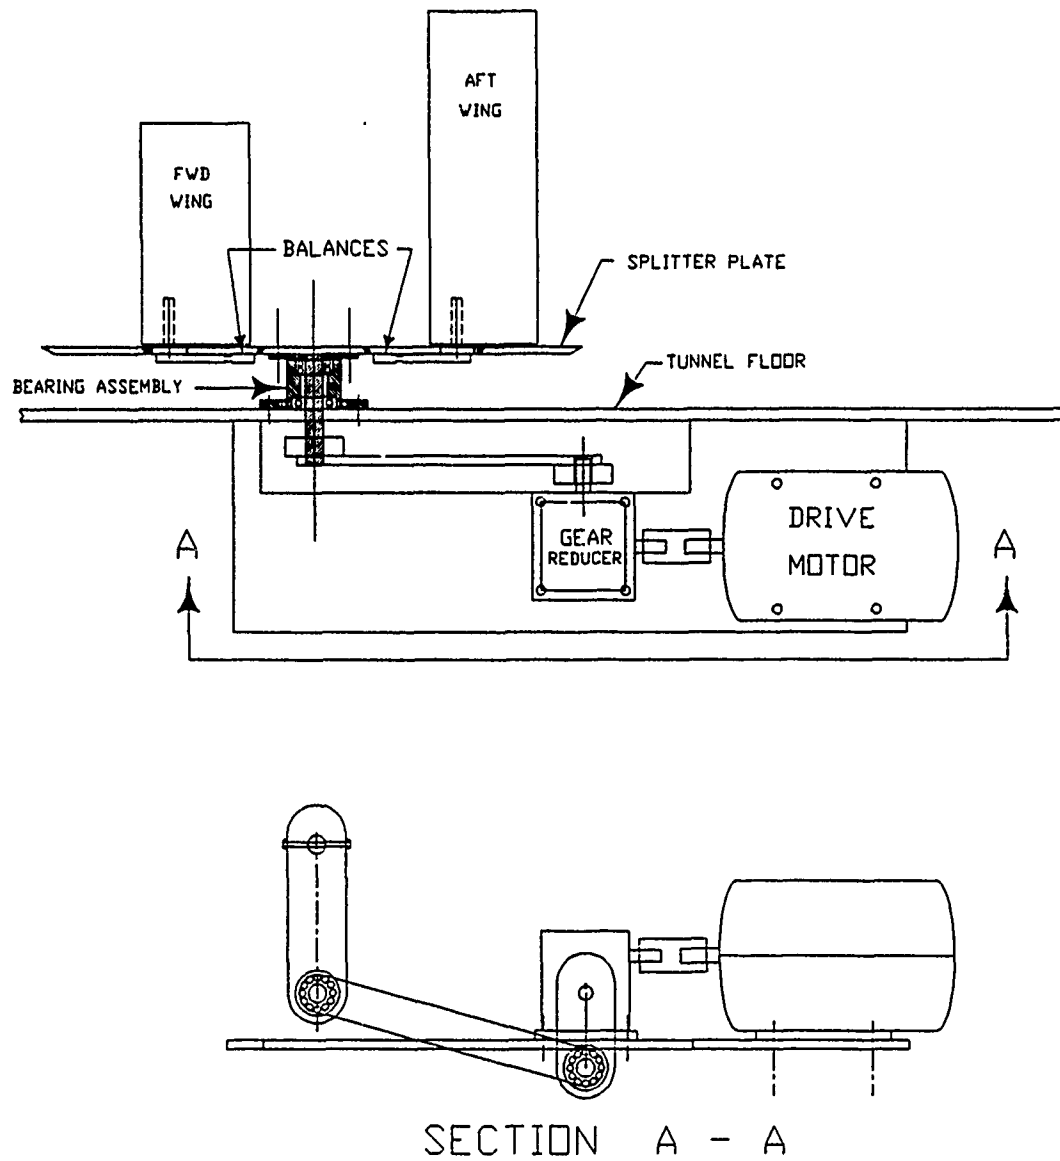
Sideview of Splitter Plate, Wing Assembly, and Drive Motor Assembly
